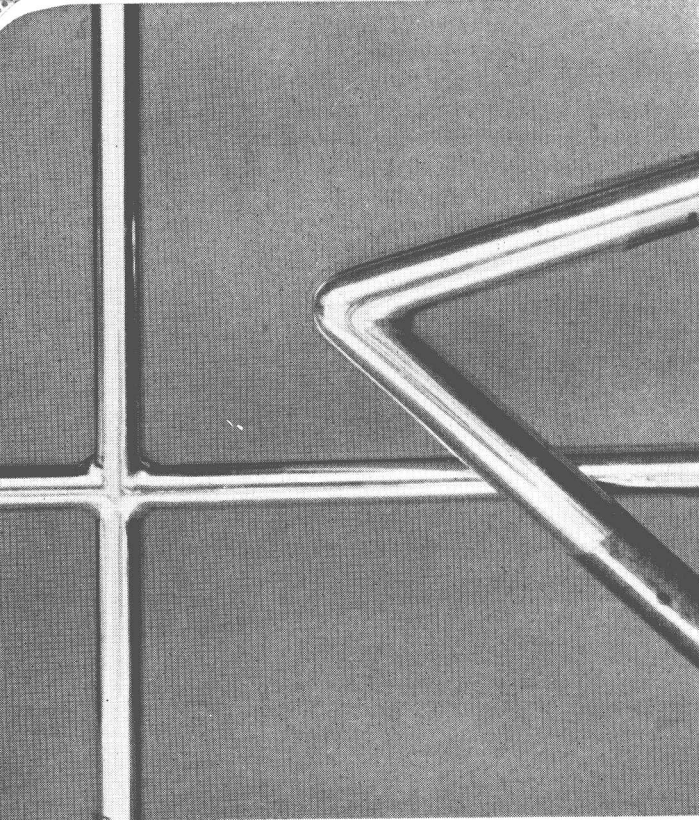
Aluminum tubing welded with a P & H 300-ampere H. F. AC welder. Note smooth, highly polished welds. Harnischfeger Corp. photo.
